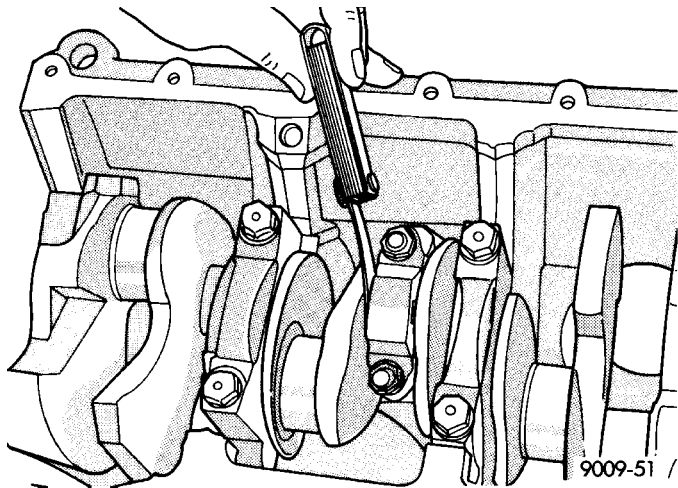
Checking Connecting Rod Side Clearance - Typical
